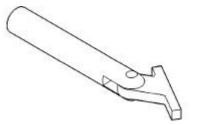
REMOVER/INSTALLER - C-3059A Courtesy of CHRYSLER LLC
